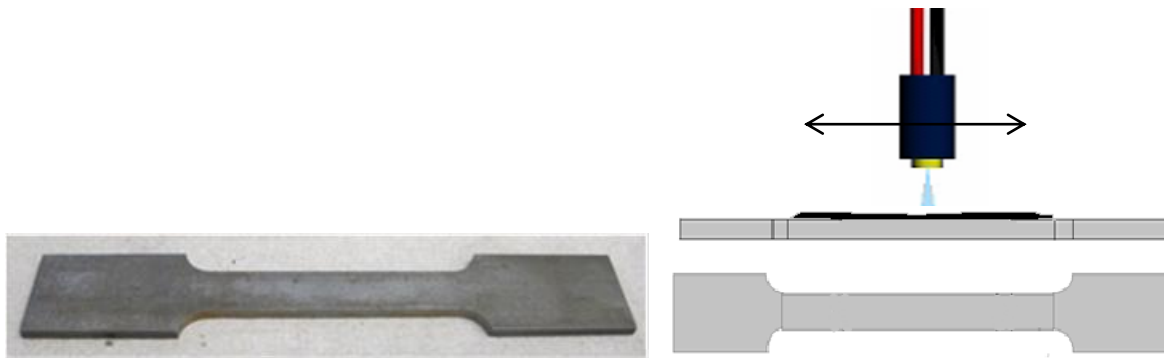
(a) The plain, un-grooved tensile test specimen. (b) The coating deposition resulted in a mid-thicker area than the initial one.
